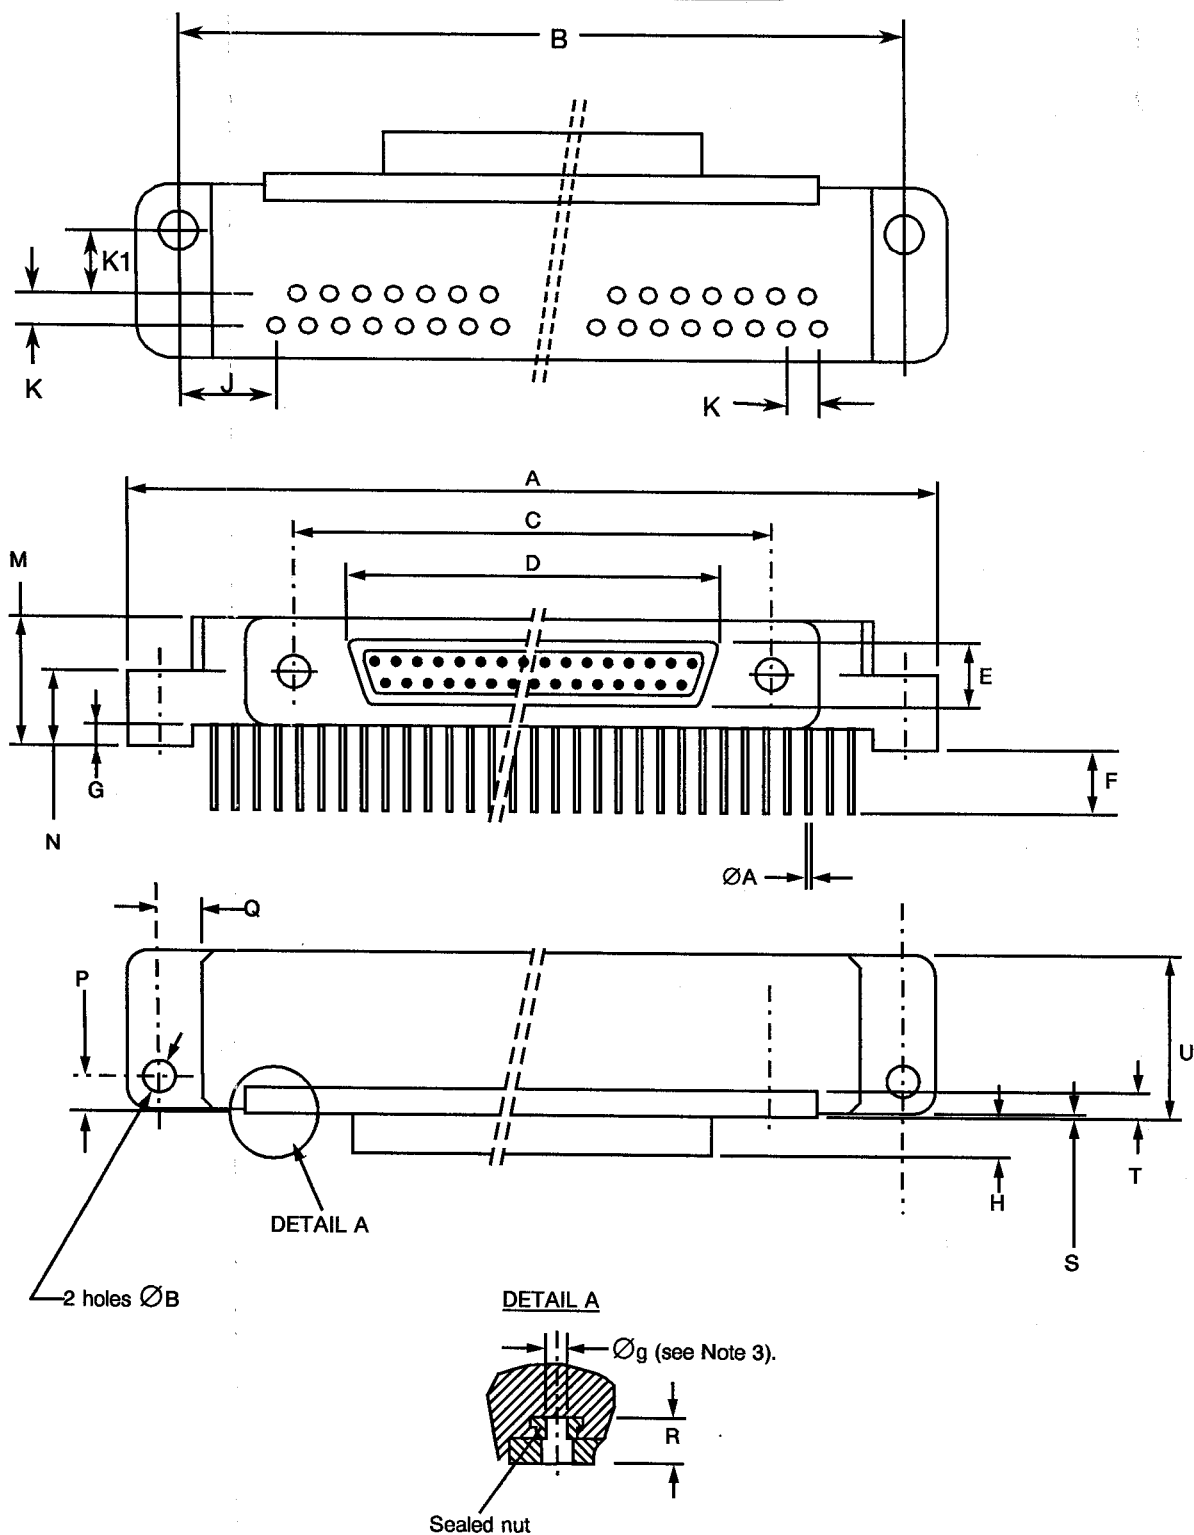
PHYSICAL DIMENSIONS (CONTINUED)
